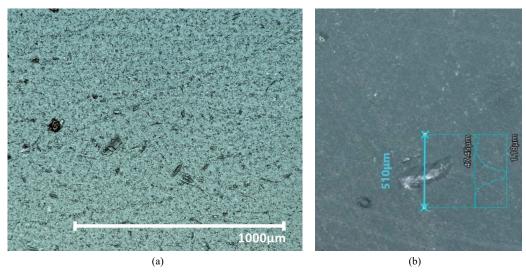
(a) Micro-damage at an AGC blue surface due to machining, (b) shows a 46µm deep surface chipping damage evoked during grinding around a crystalline inclusion.
